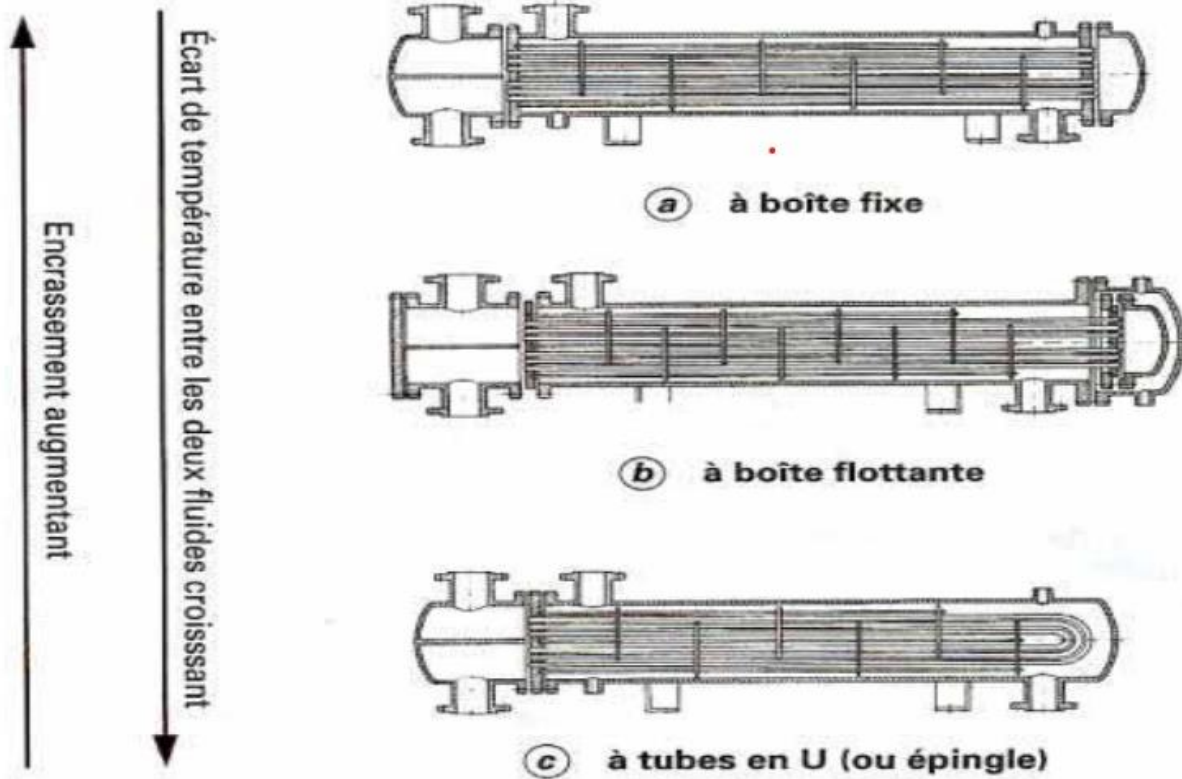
tube and shell exchanger: main technology with fixed box, floating box and U tube.
